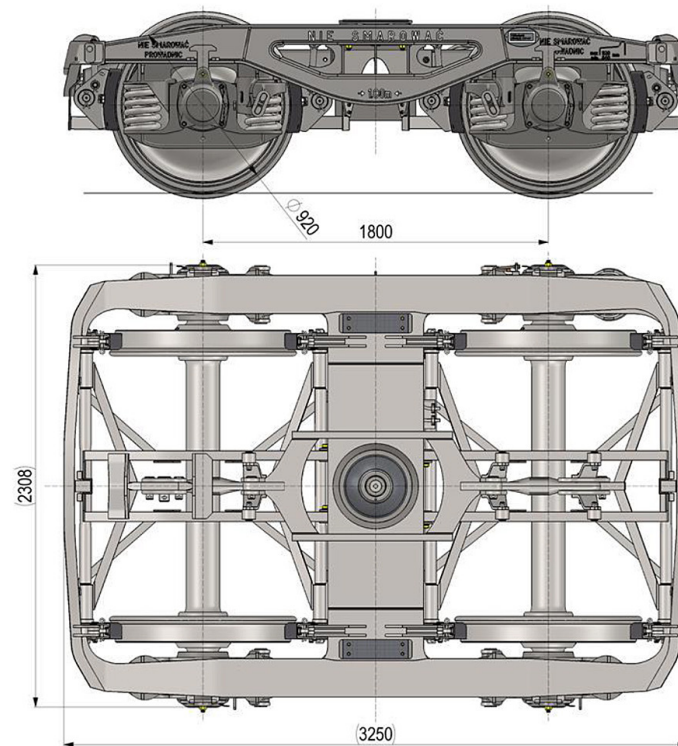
Standard gear system with the so-called light S brake gear (brake beam type 60 kN) and Bgu brake pad
